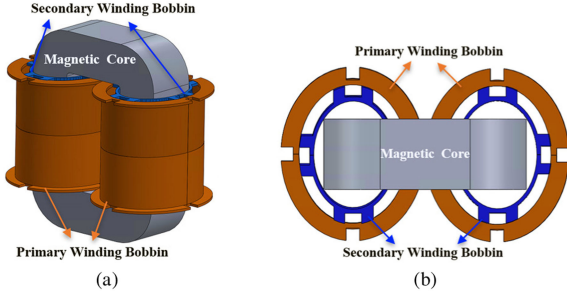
3-D printed two layers bobbin design. (a) 3-D view. (b) Top view.
